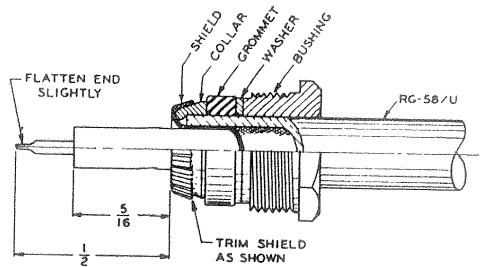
Cable Service For Connector, Plug (D-C Plug P-101)
